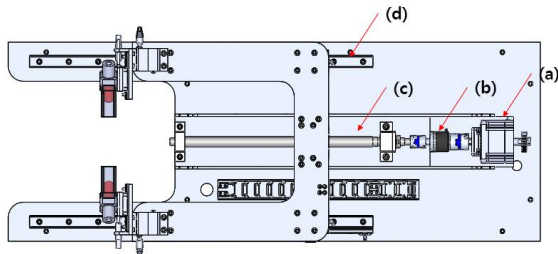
Schematic drawing of scanner module; (a) stepping motor, (b) encoder, (c) ball screw, (d) LM guide
